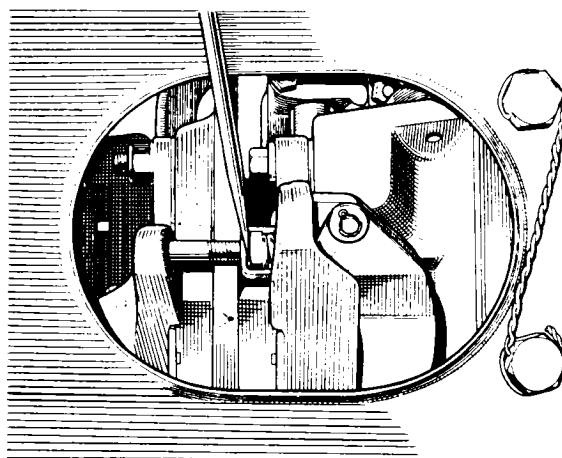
Preloading the handbrake caliper return spring with a screwdriver
